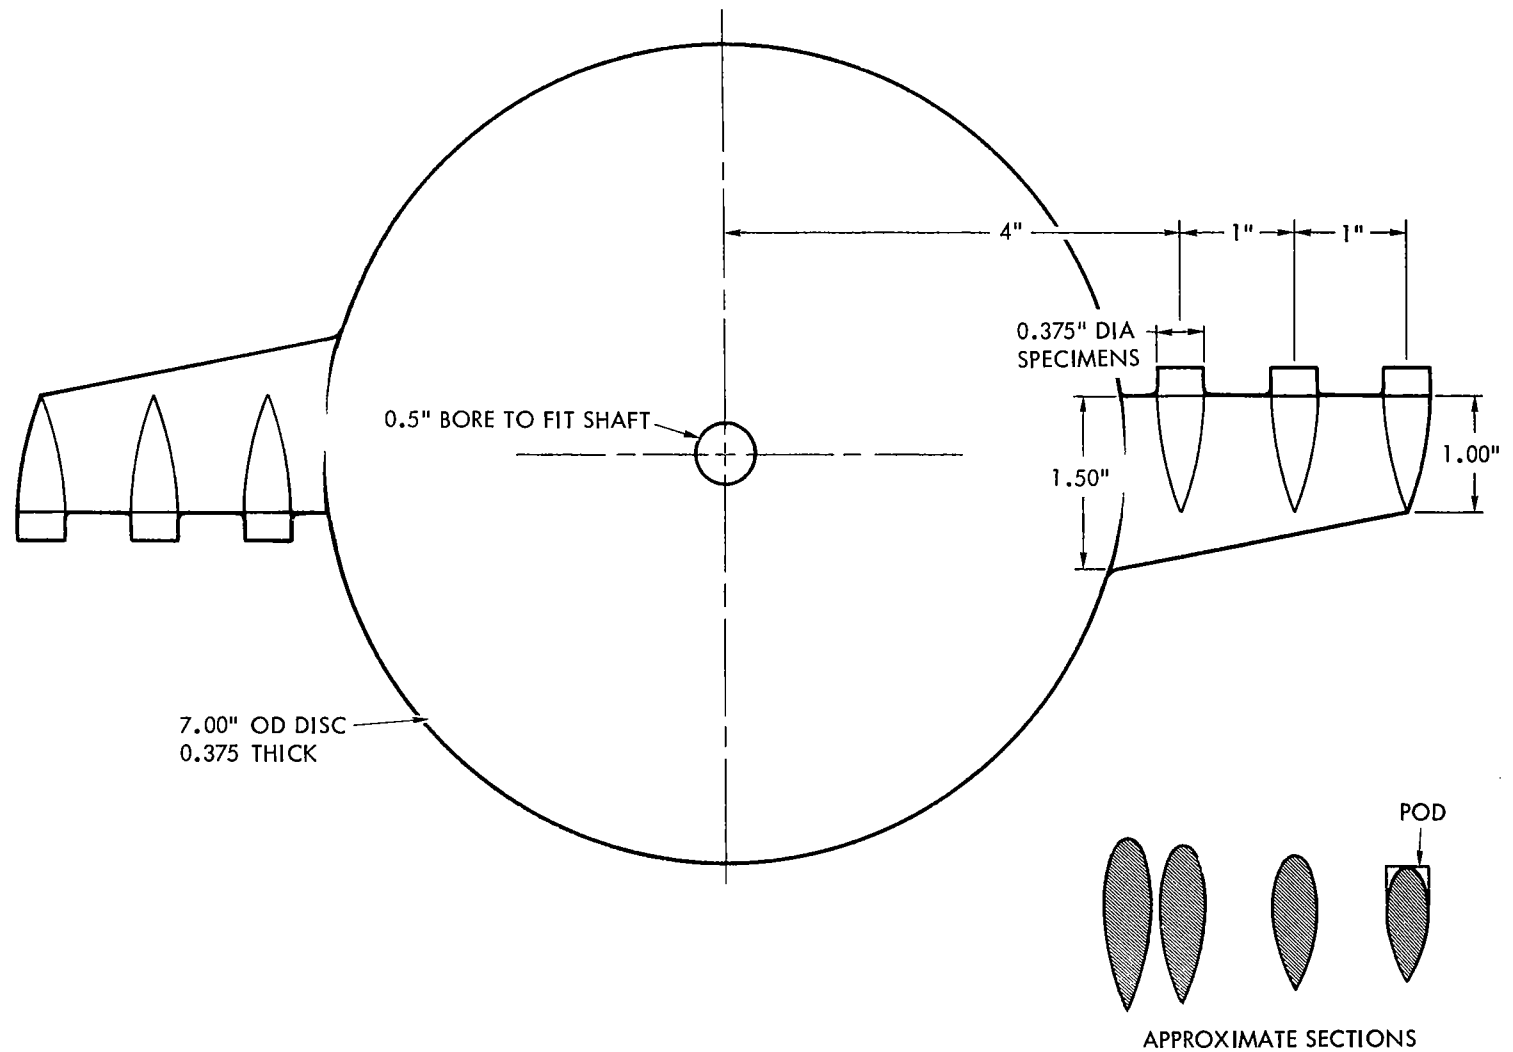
ROTATING DISC CAPABLE OF HOLDING SIX SPECIMENS
